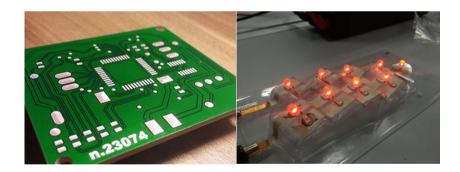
2-Dimensional and 3-Dimensional type of PCB
